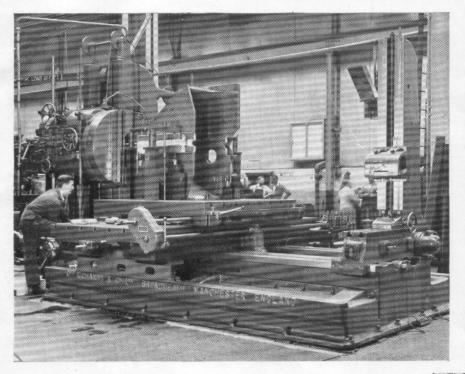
General view of a Richards No. 5 PRT Horizontal Borer, wide bed model, in the Heavy Machine Shop, set up for machining a fabricated castor bracket.
